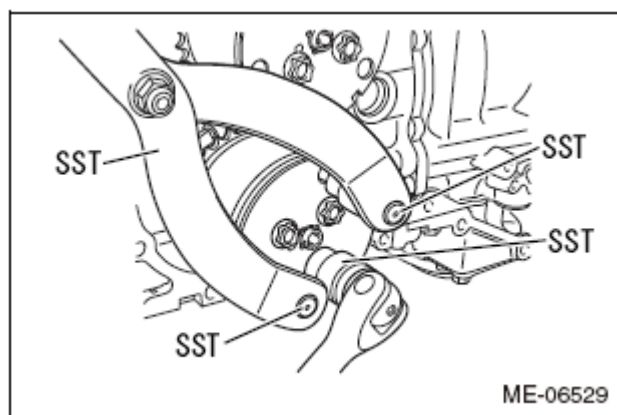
Removing Camshaft Timing Exhaust Gear Assembly RH
